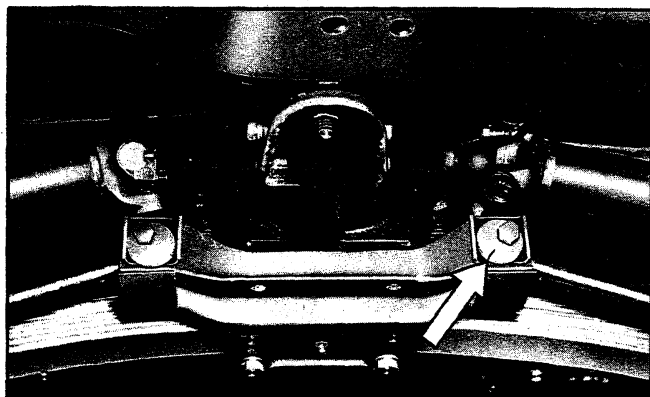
Marking Camber Cam and Bracket (Corvette)
